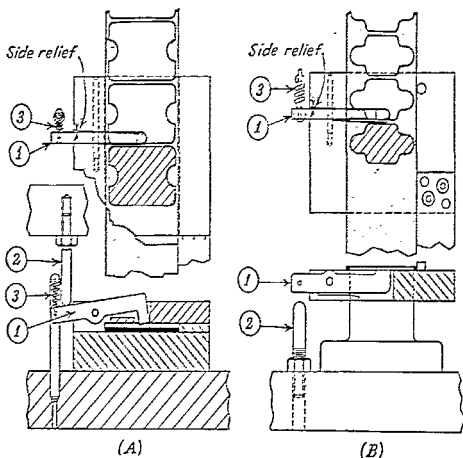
Trigger stops: (A) top stock engagement; (B) bottom stock engagement.²⁷
